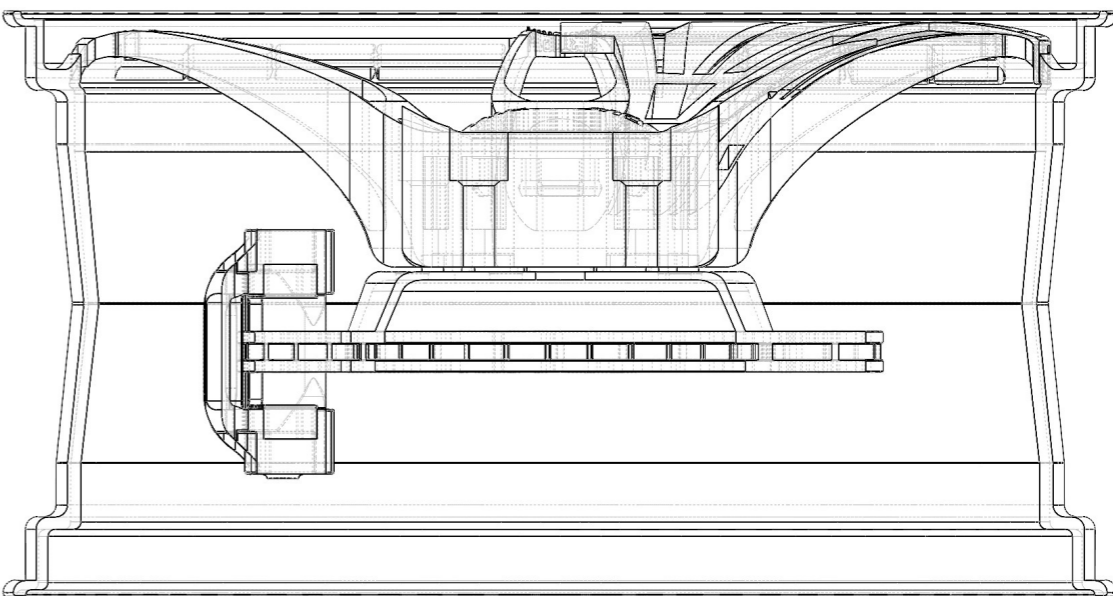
Cross section view when brake disc and caliper assembled on to the CB1
